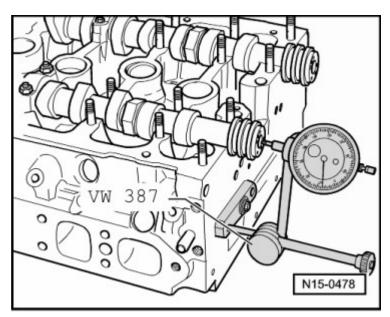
Checking Camshafts Axial Clearance Courtesy of AUDI OF AMERICA, LLC
